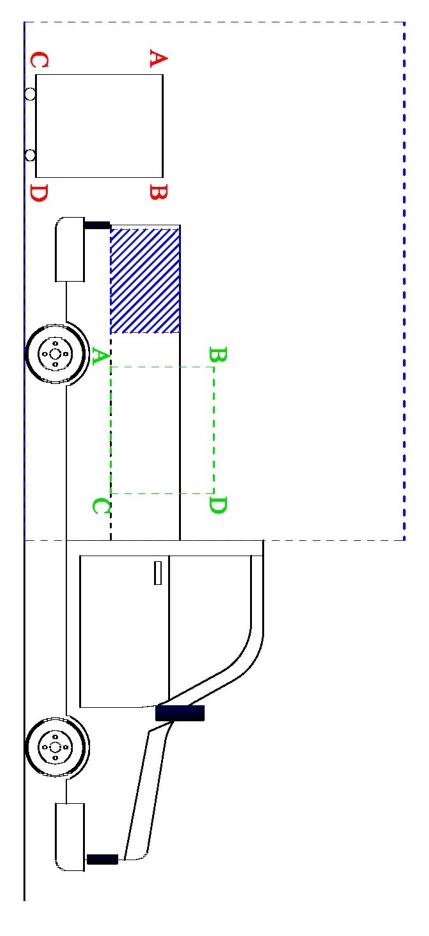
A worksheet to assist with the mechanism design. Scale: 10 mm = 333 mm.
